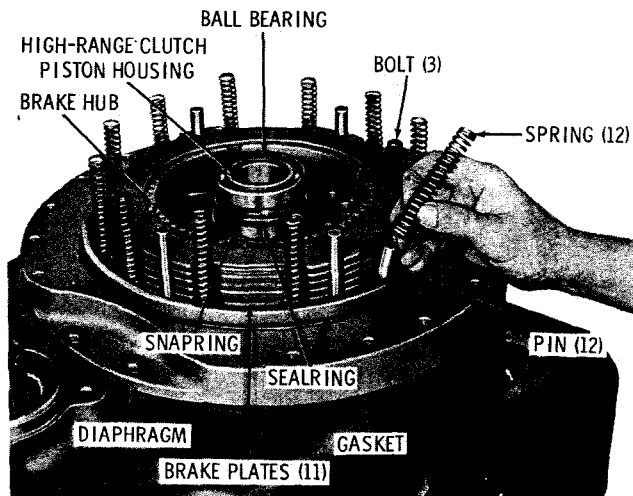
Removing brake return springs and guide pins (TTB 2221-1, 2421-1)
